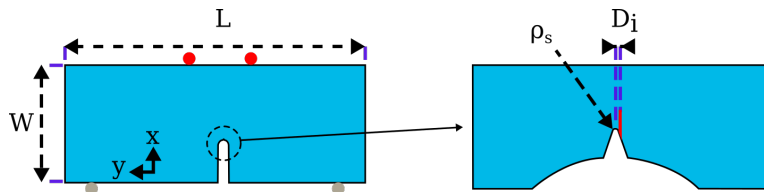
Schematic representation of the samples and definition of geometrical parameters. Left: general view of the specimen. Right: magnification of the notch tip. The crack is schematized in red. The dimension of the sample along the z -axis (thickness) is depicted by the parameter B in Table 1.
